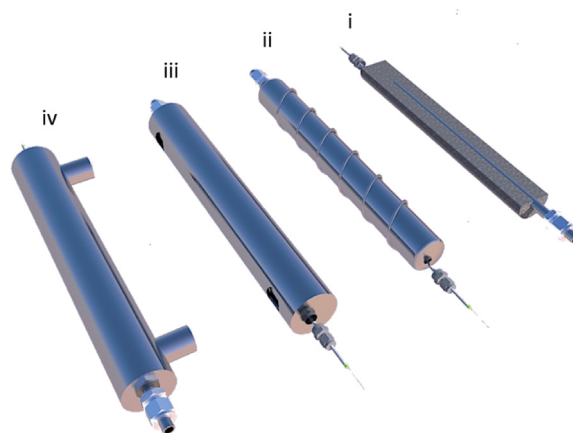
Details of the design of the MH-reactor with a CAD highlighting: i) the powder with inside the porous filter for the flow of H₂, ii) the external part of the inner tube with the capillary, iii) and iv) the external jacket and coating.
